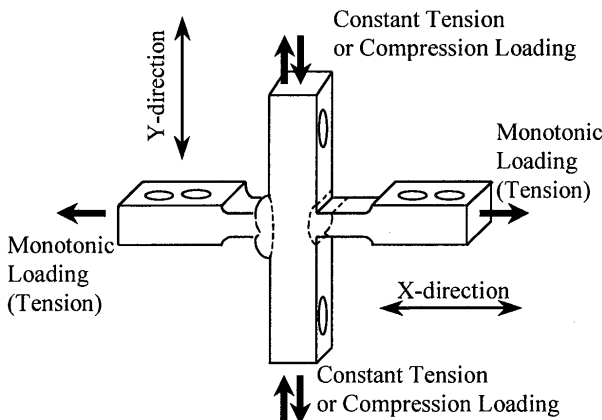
A conception shape of cruciform butt specimen and Loading Condition
